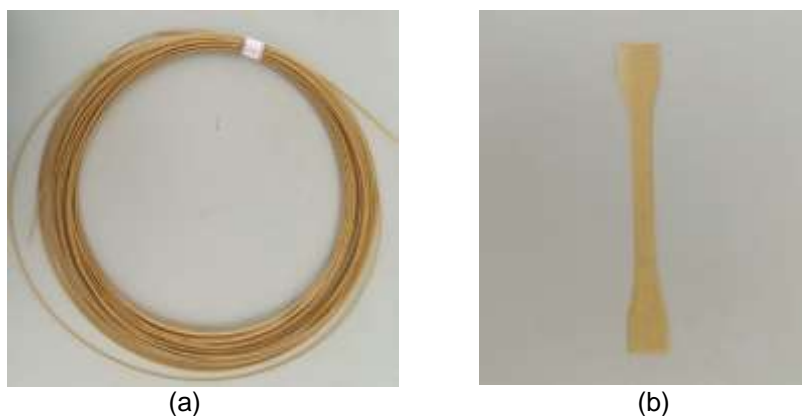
Images of 3D printing filaments (a) and a standard specimen (b)
